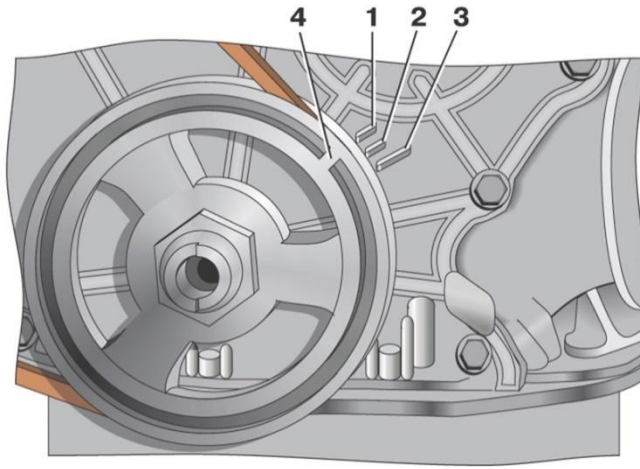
Marks on crankshaft pulley and crankshaft sprocket.
